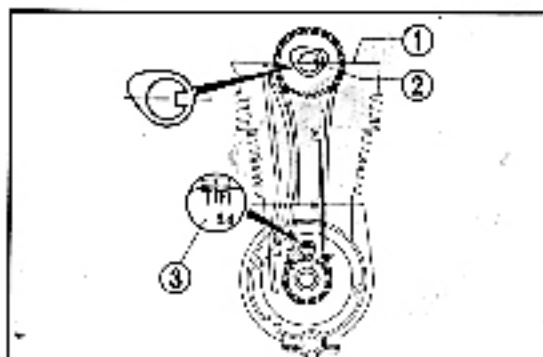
① Cylinder head flange surface ② Cutout notch ③ Spark advancer
